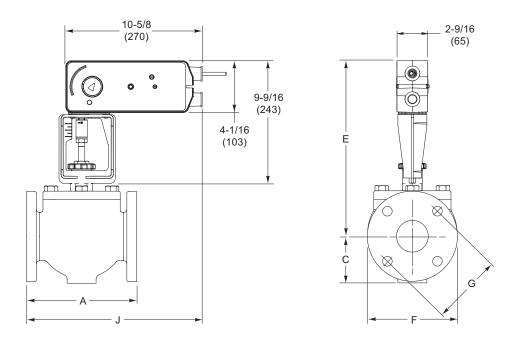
Mx61-720x with 21/2" to 4" N.O. 2-Way Flanged Globe Valve.
